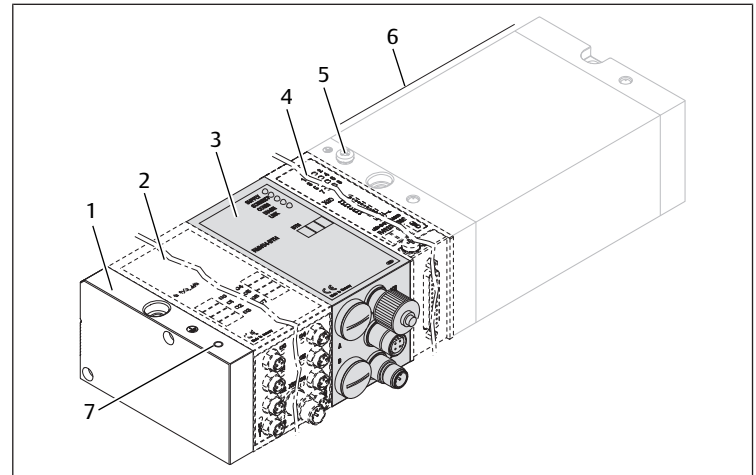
Bus coupler device overview with I/O modules and valve terminal (sample configuration)
